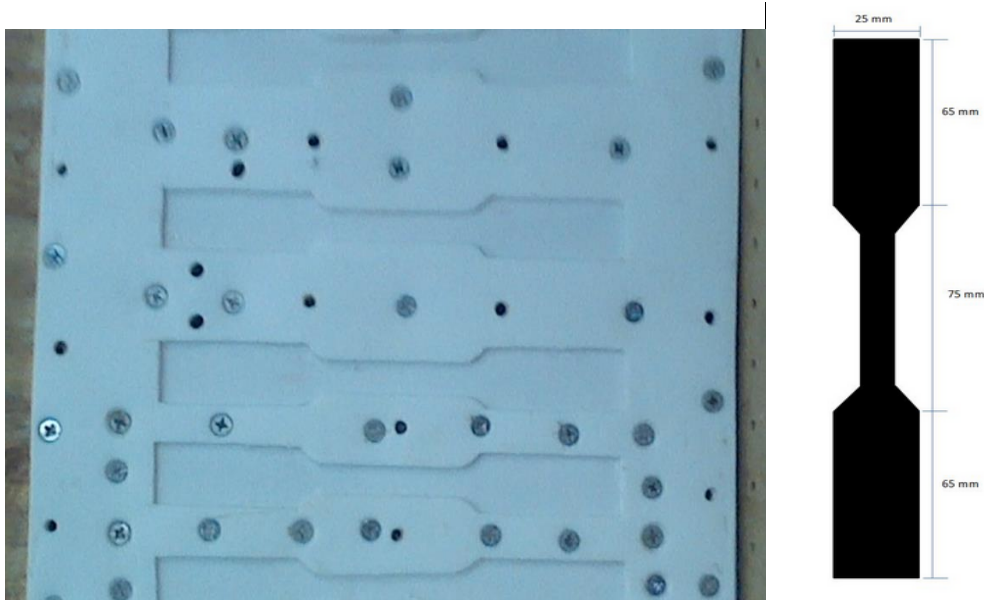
Dog bone Teflon mold used to obtain uniformly shaped and easily removable samples.
